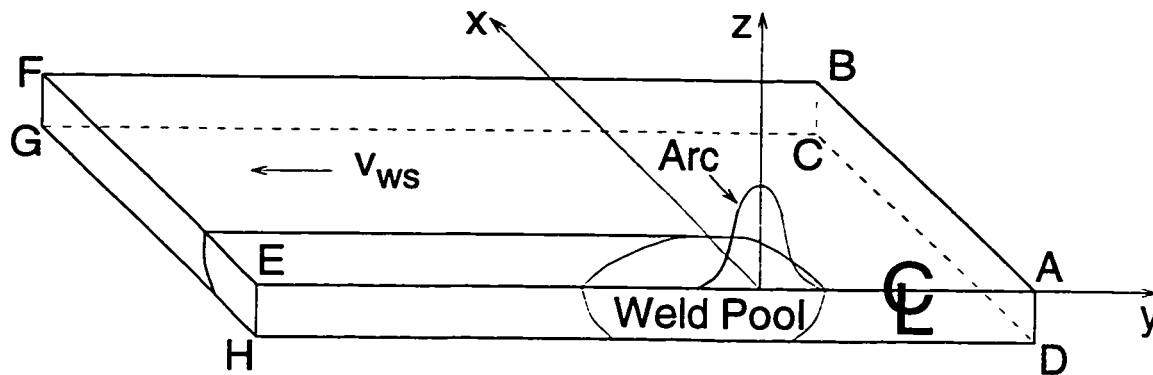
Model definition for full-penetration, steady-state GTA welding.
